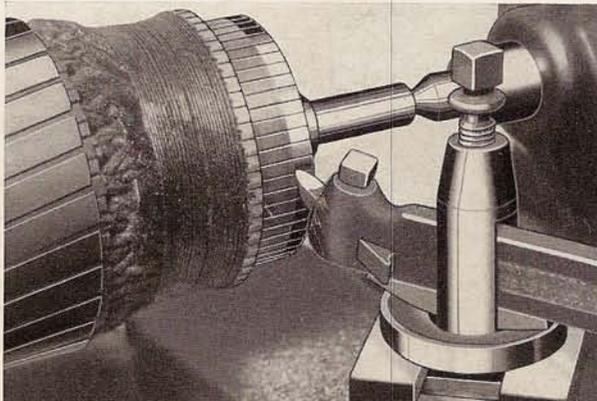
Close-up Showing the Lathe Tool Taking a Smooth Finishing Cut Across the Armature Commutator.
